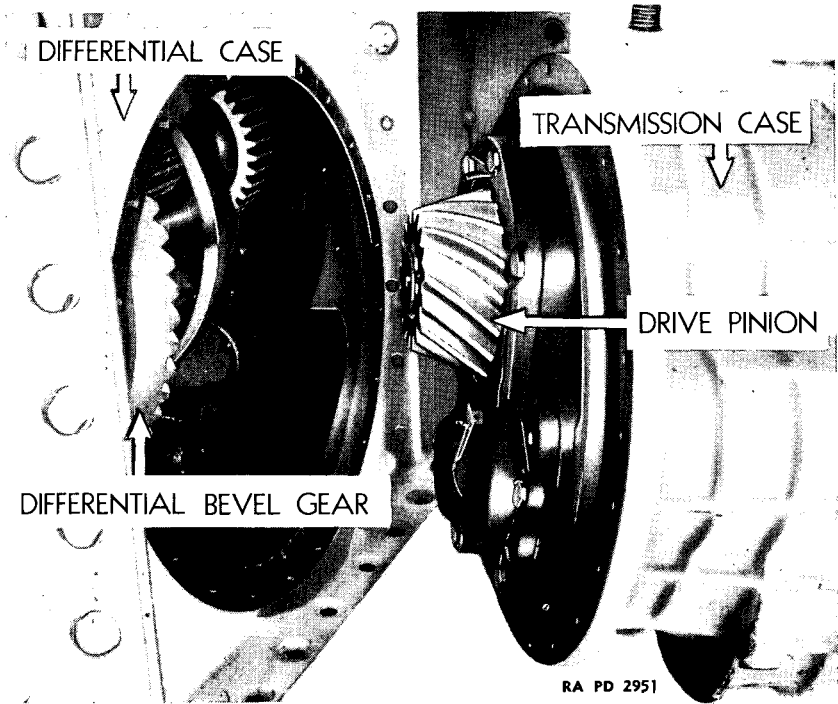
TRANSMISSION REMOVED FROM DIFFERENTIAL
